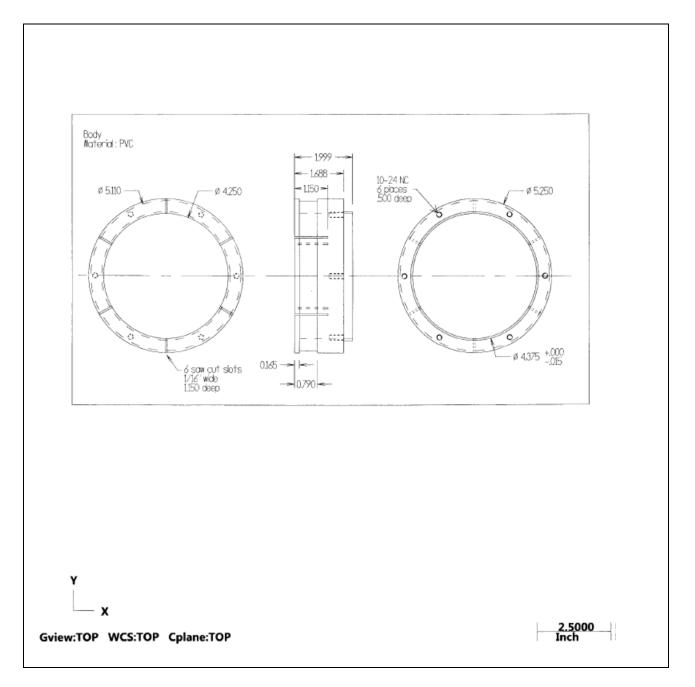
Technical drawing of the body collar which is the bottom attachment in the depth control ring assembly (3 views)
